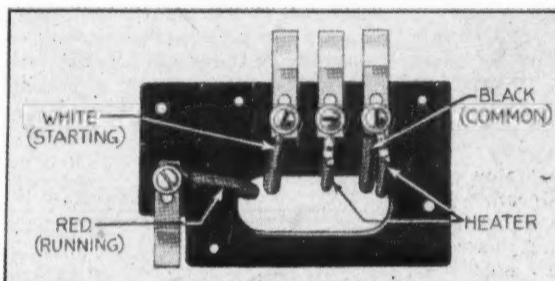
Top view of base plate for DR-1 and DR-2 machines with Type E control.
